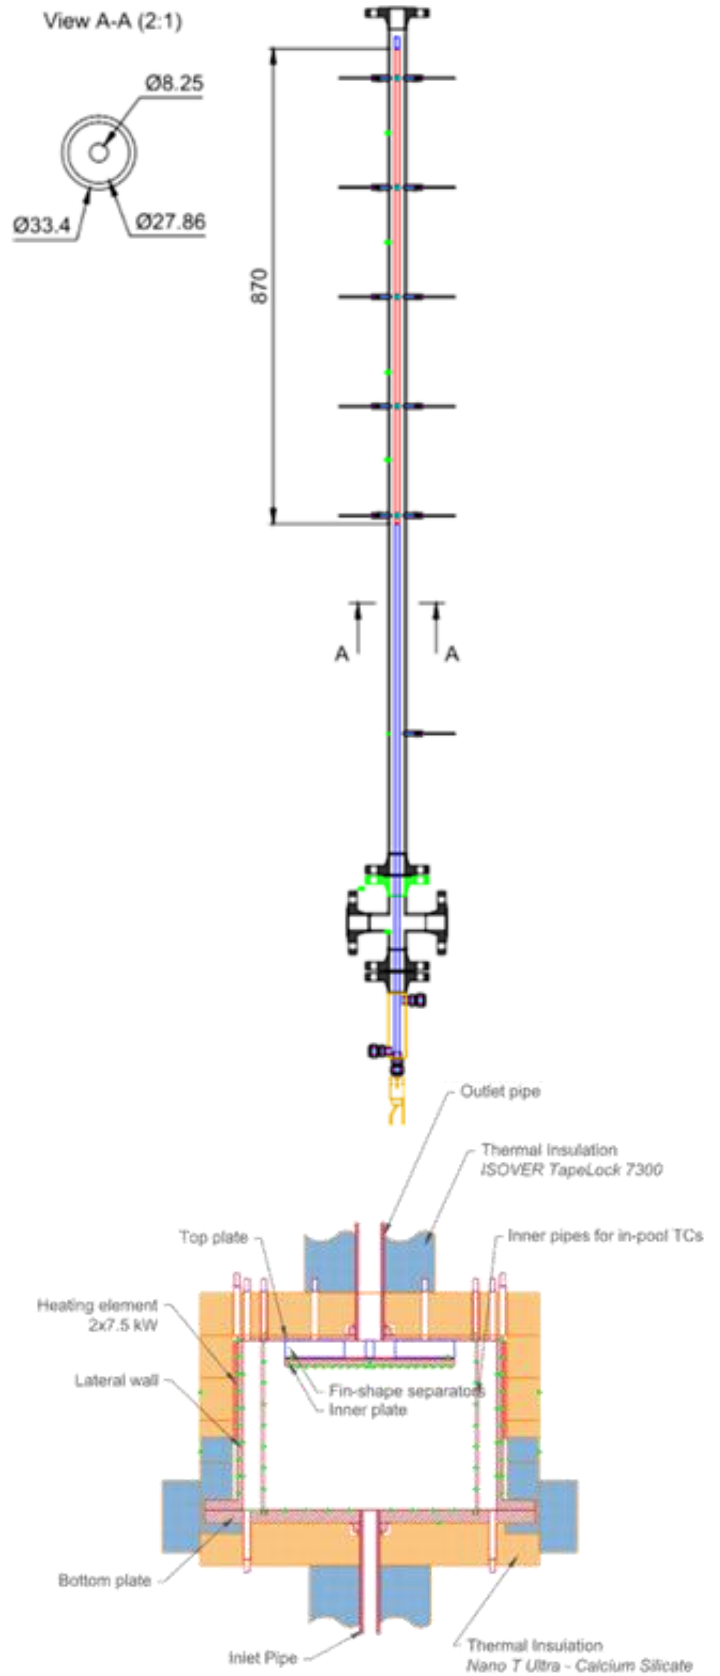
TALL-3D primary side, pin-like Main heater and pool type Test section
